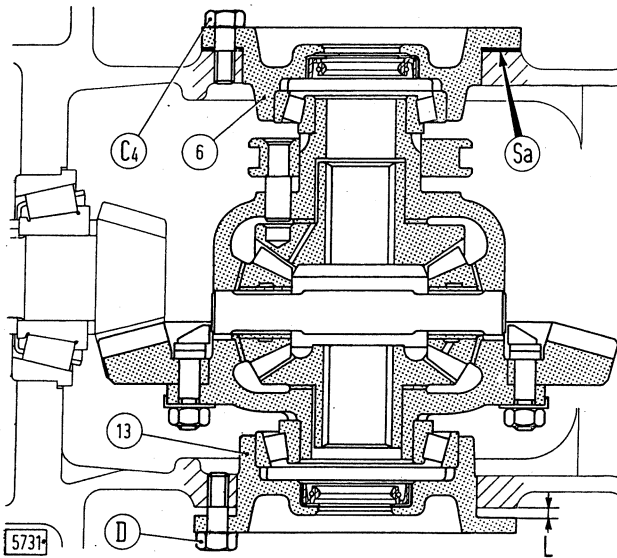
Adjusting the differential-bevel gear tapered roller bearing.
